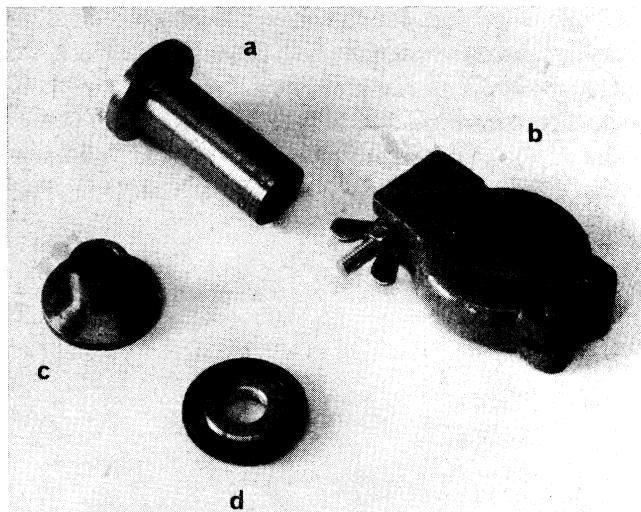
Component parts of O-ring seals (*Courtesy of Heraeus⁵⁴²*)
